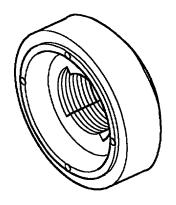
Setting Up to Machine I.D. of Bushing or Lug at Location 1, Y453.000 (Sheet 1)
